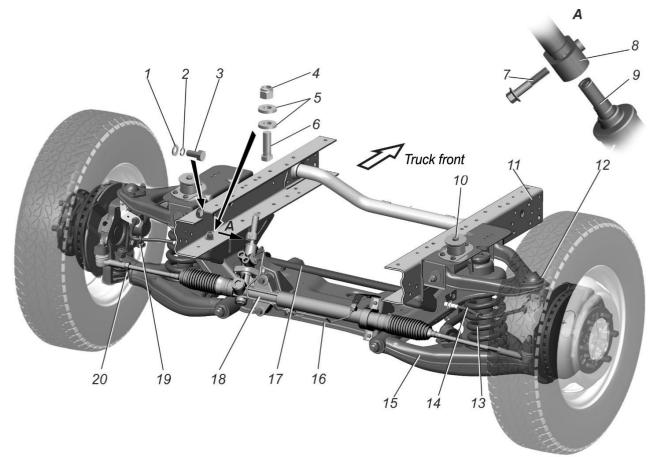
Installation of front suspension with steering gear: 1, 2, 5 – washers; 3, 6, 7 – bolts; 4 – nut; 8 – steering universal joint; 9 – steering gear input shaft; 10 – front body support mounting bolt; 11 – frame; 12 – upper ball joint; 13 – spring; 14 – front brake hose; 15 – lower arm; 16 – subframe; 17 – antisway bar; 18 – steering gear; 19 – brake caliper mounting bolt; 20 – lower ball joint.
